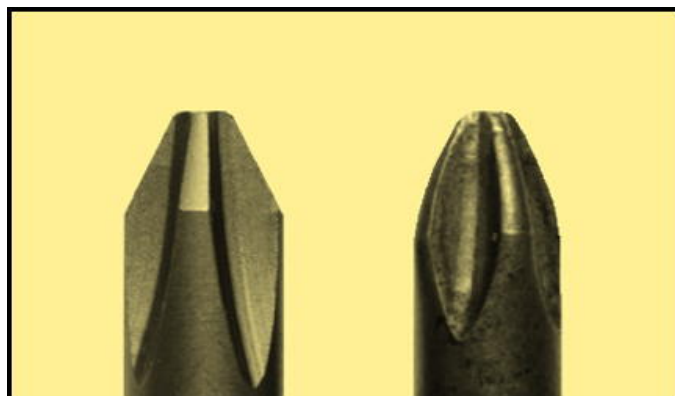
JIS screwdriver tip is on the left and a Phillips head screwdriver tip is on the right'.
